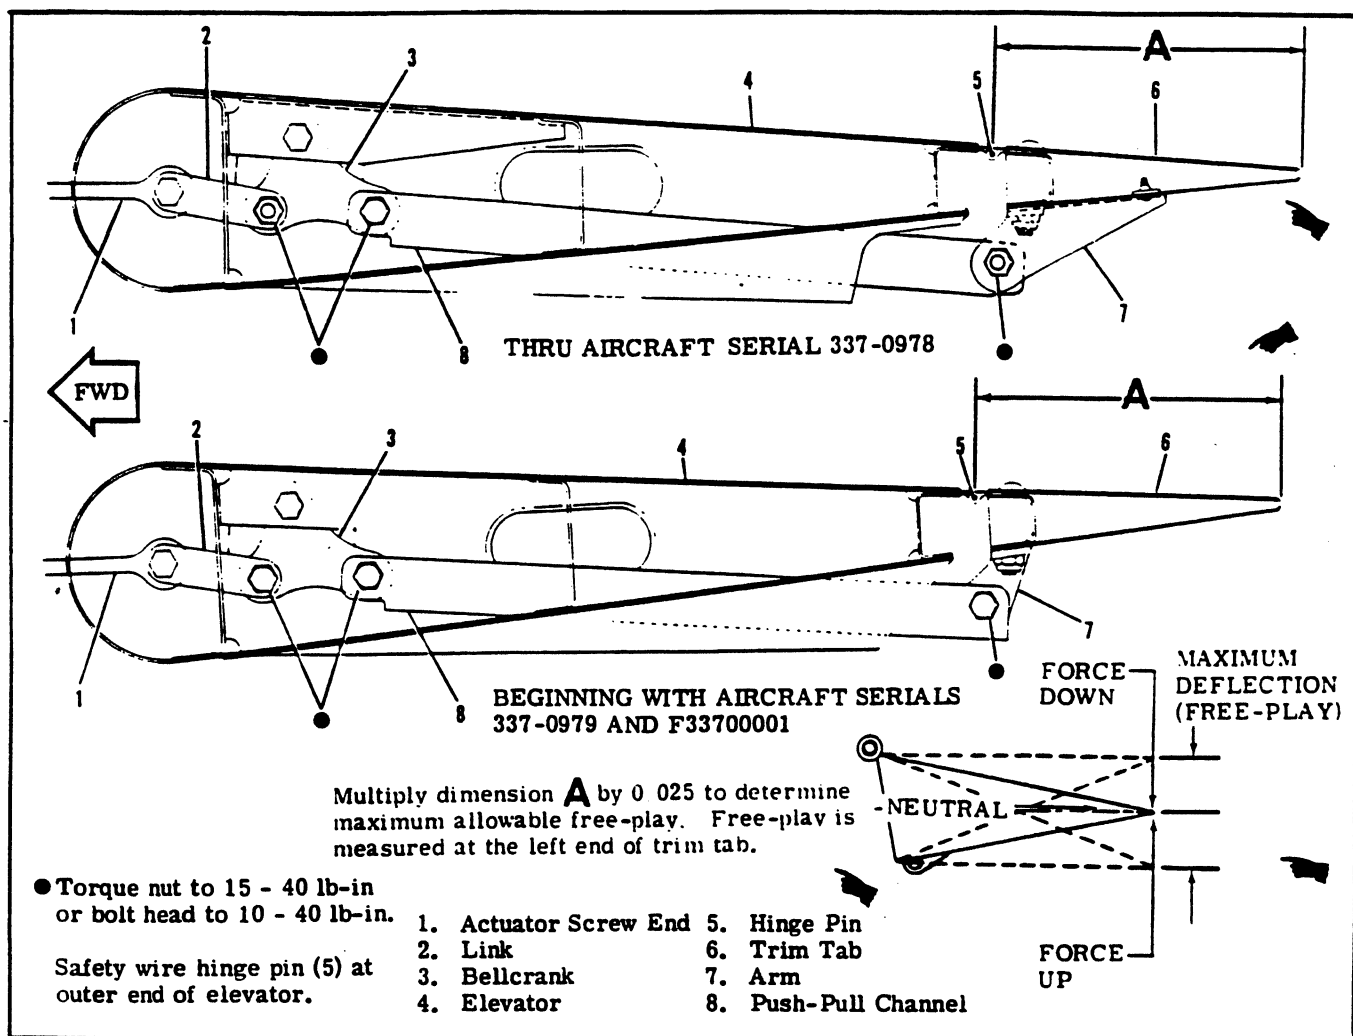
Elevator Trim Tab Linkage and Free-Play Inspection
